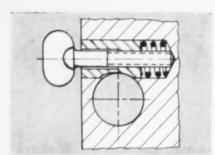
Springs can also be used in conjunction with bolt style clamps shown.
